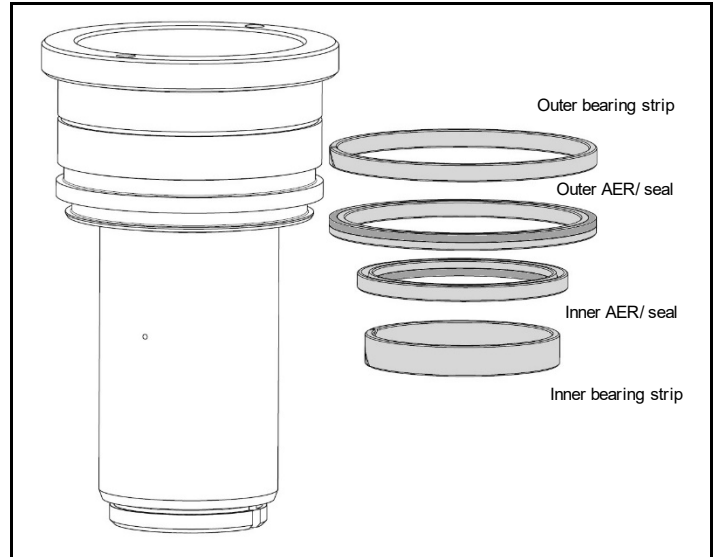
Piston, outer AER/ seal, inner AER/ seal, bearing strips
